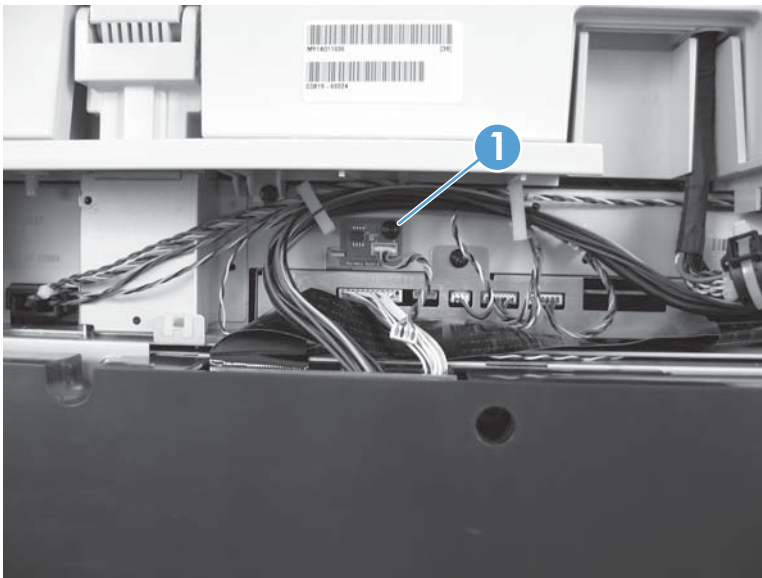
Remove the image scanner memory board (2 of 3)
